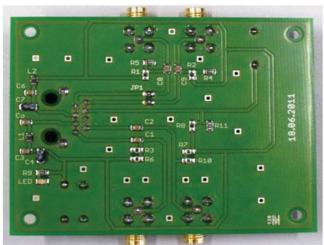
(b). Bottom side of the AFBR-0544Z evaluation board
